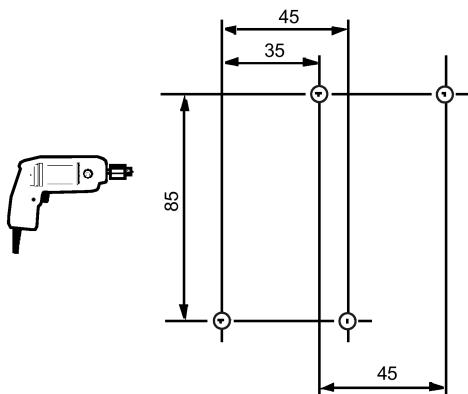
Drill hole spacing for screw mounting (dimensions in mm)
